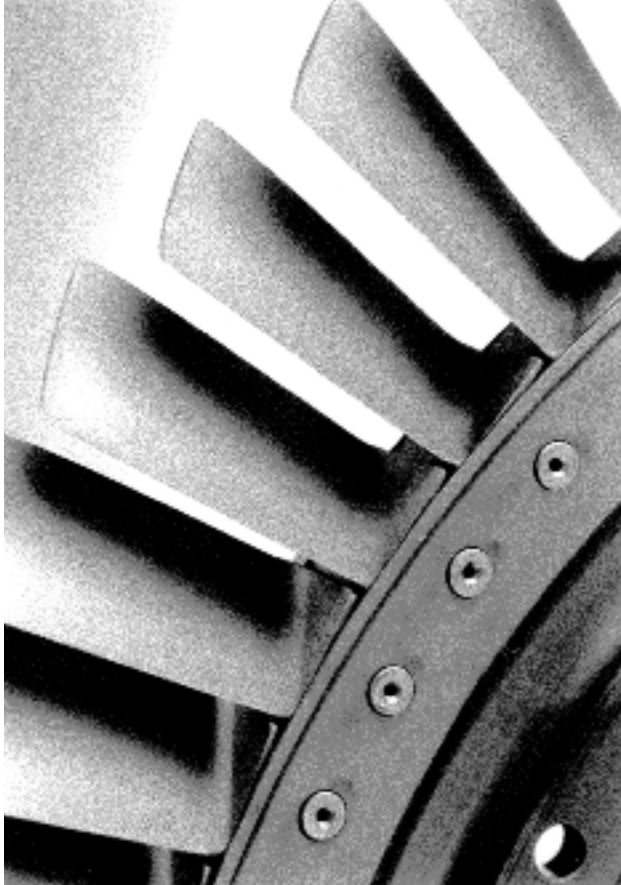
A close-up view of the pin-fixed blade root fixing arrangement of the Pratt & Whitney JT8 stage 7 blades.
